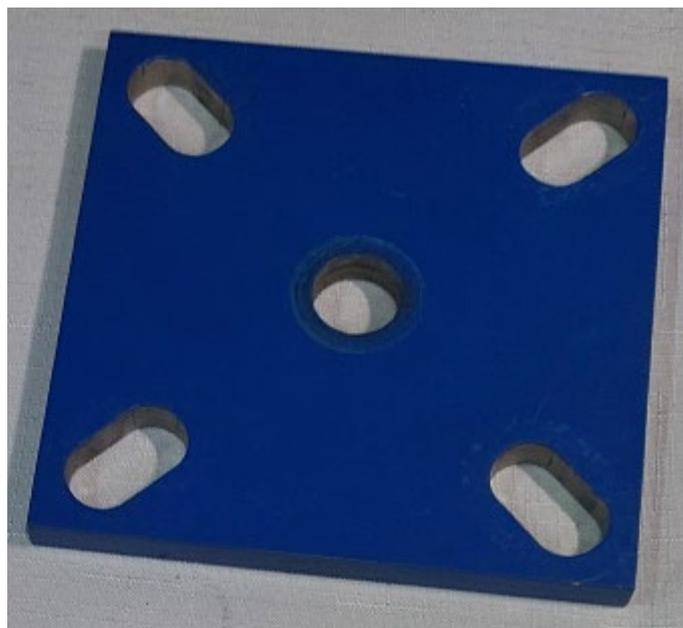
View of the plate (2 pieces) securing the impeller. Plate dimensions: 130x130x11mm. The diameter of the central hole is $\text{Ø}20\text{mm}$. The longitudinal millings ("beans") have the following dimensions: 17x29mm
